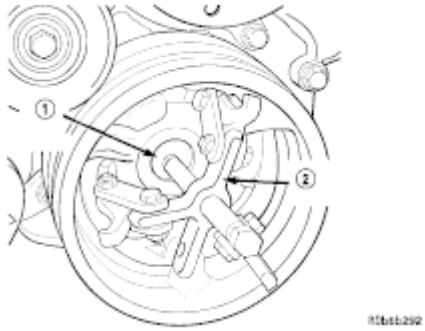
Removing Damper Using Special Tools 8513 Insert And Tool 1026 Three Jaw Puller
